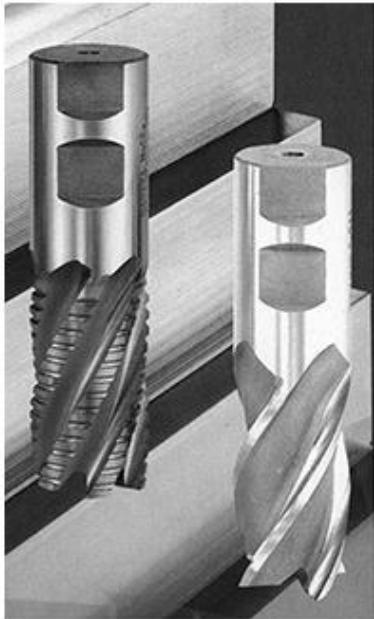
Solid end mills are often coated. Insert tooling end mills come in a variety of sizes and are mounted on taper shanks.
